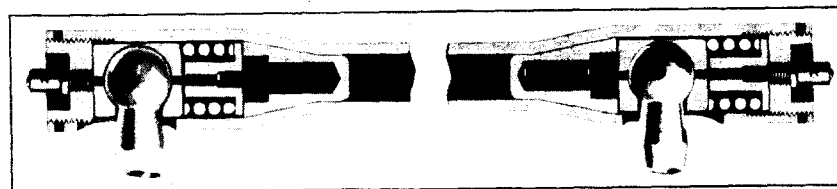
To adjust the joints at the ends of the steering connecting rod, draw each adjusting plug tight and then back it off one cotter pin hole.
